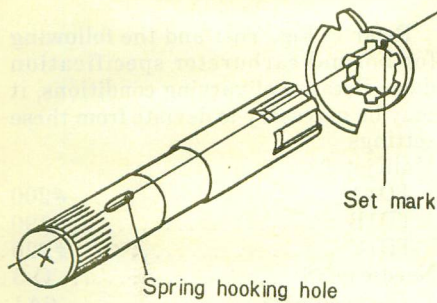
Mark on kickstarter gear should be aligned with spring hooking hole as shown.
